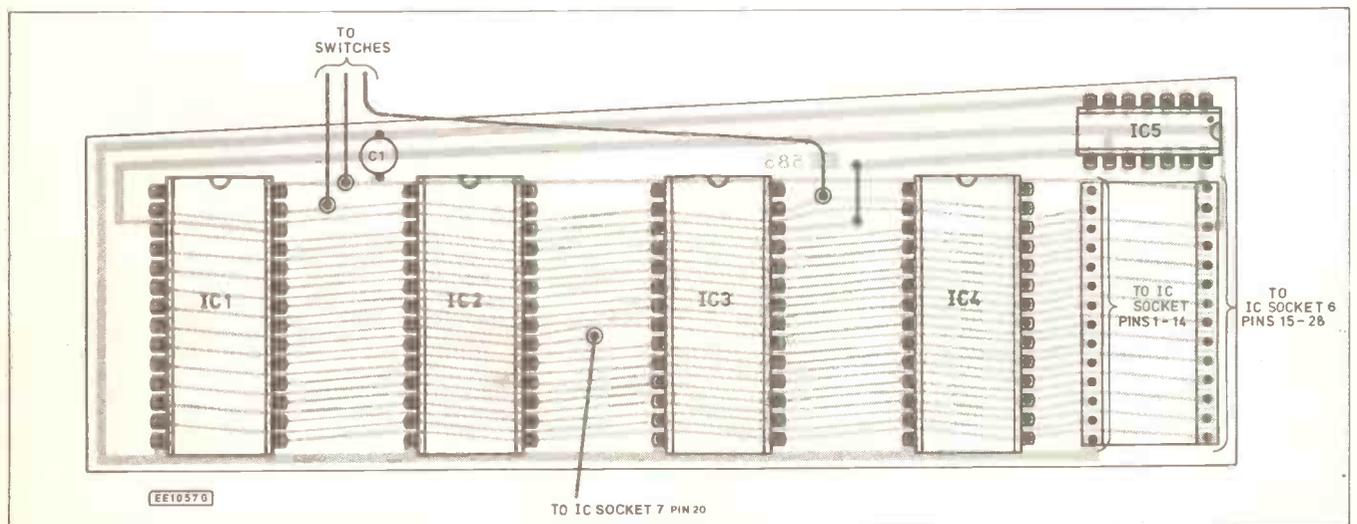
Full size printed circuit foil master pattern and board component layout.
